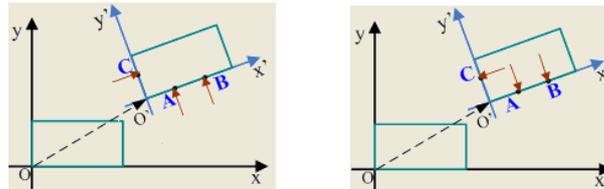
Positive Edge Finding and Negative Edge Finding
